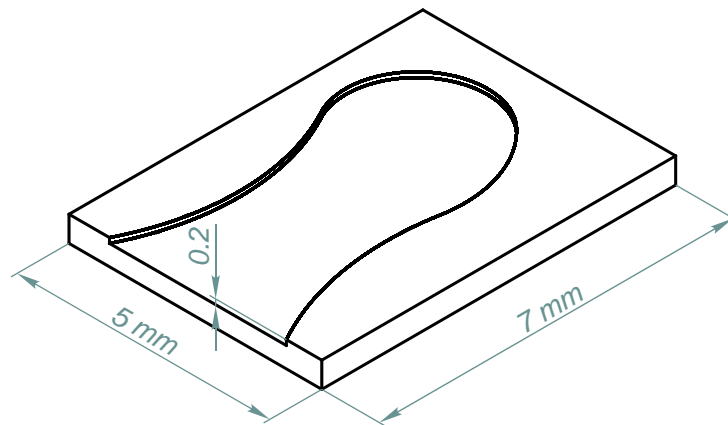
Pocket drawings for 0.794 mm diameter tool
